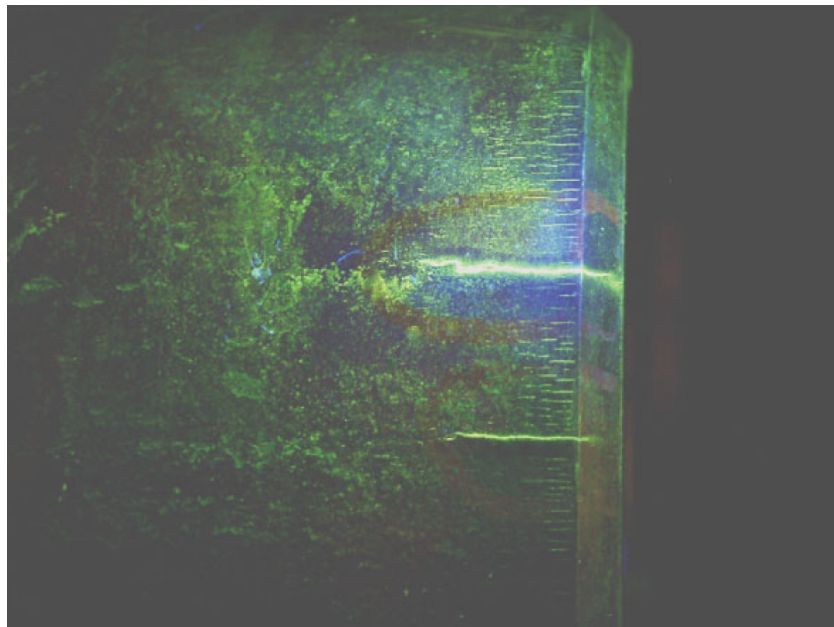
Example of heat check cracking near the primary shoulder of a box tool joint
